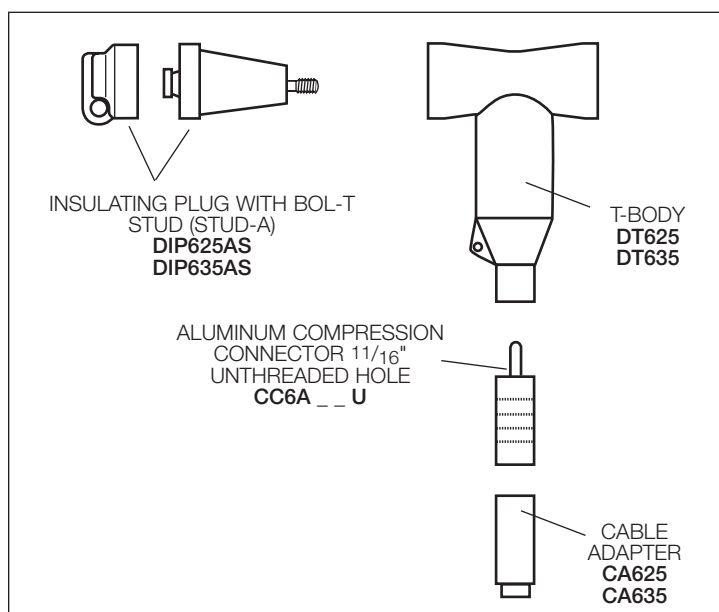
BOL-T connector kit (BT6.5) components. For more details, see catalog sections CA650003EN and CA650008EN.
